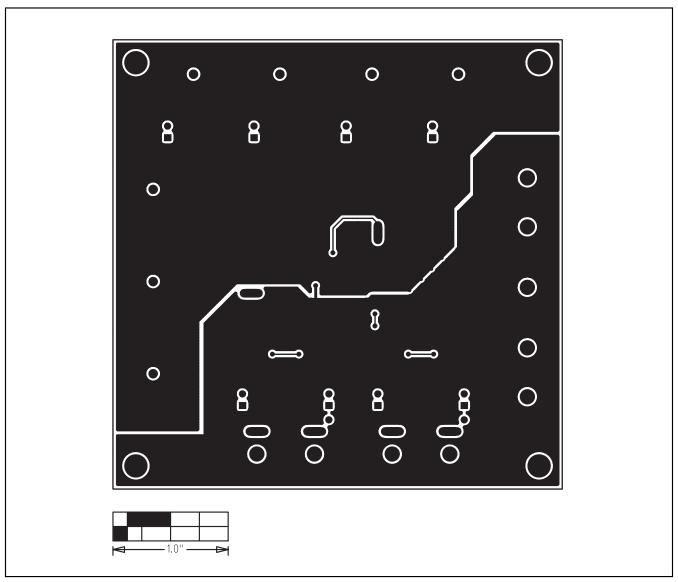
MAX4079 EV Kit PCB Layout—Solder Side
